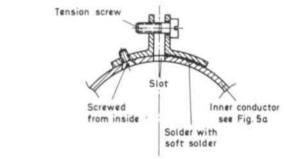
Tensioning device for the inner conductor tube with thermal fuse
